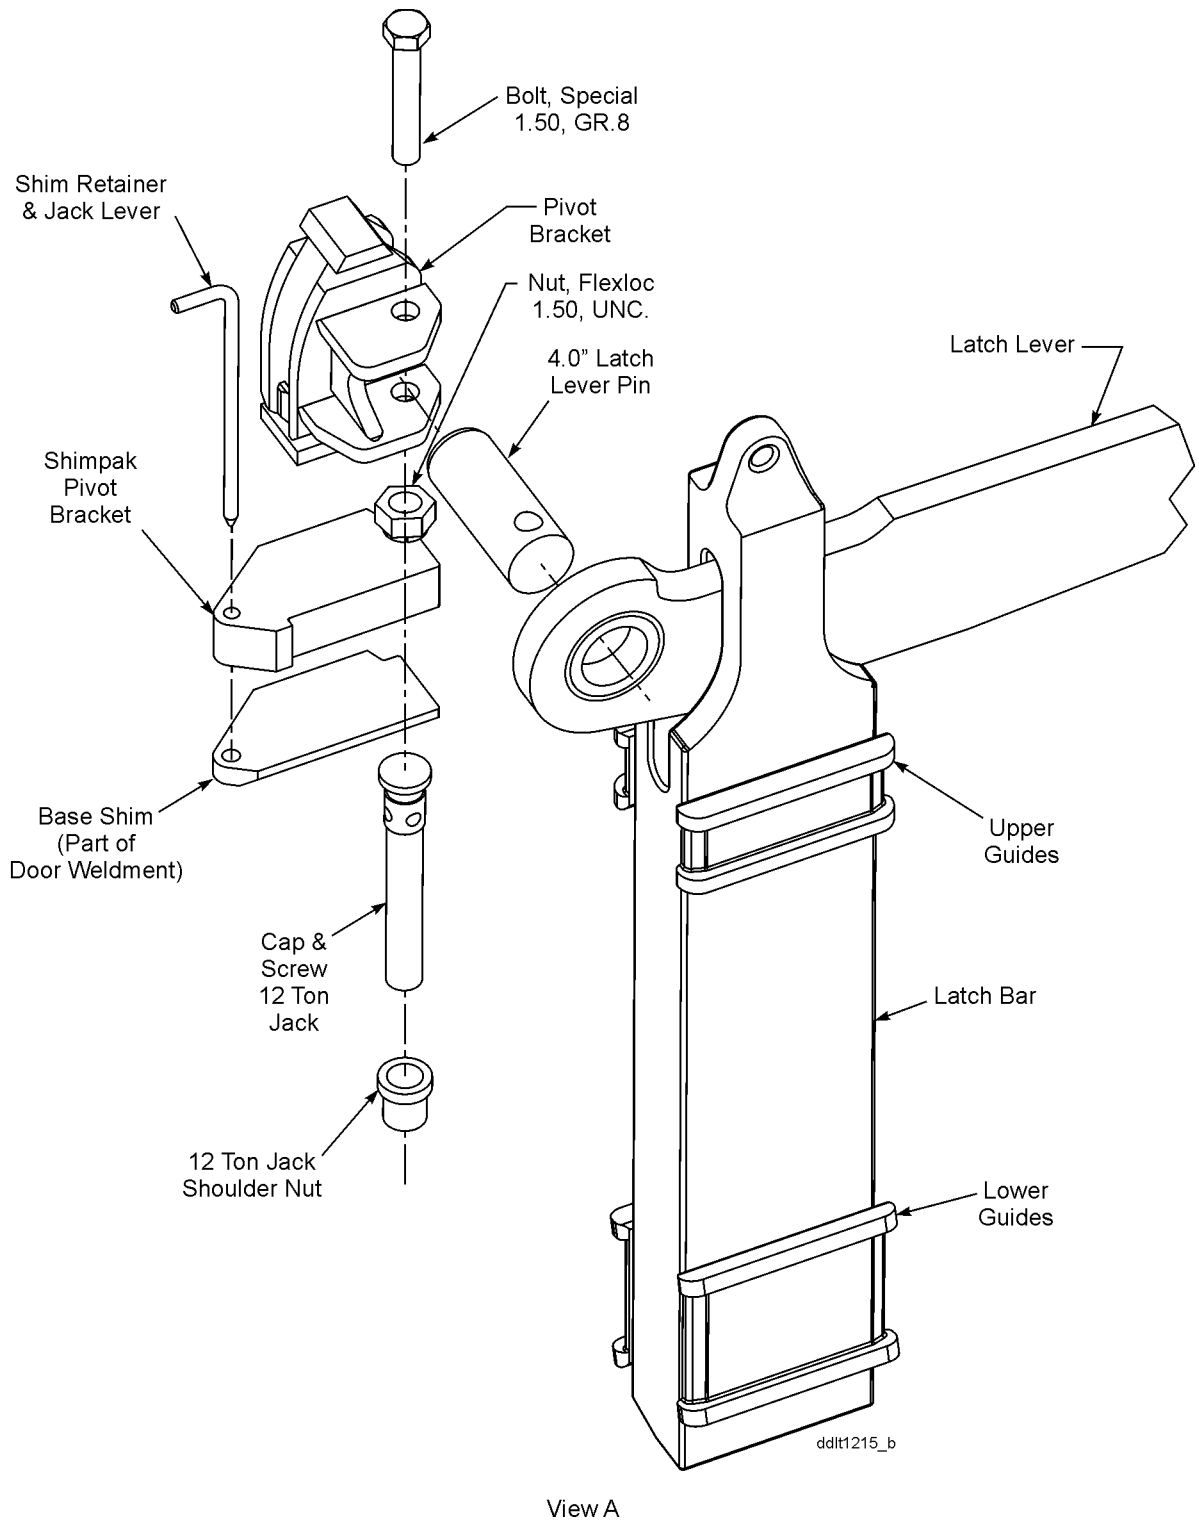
Latch Bar & Pivot Bracket Assembly
